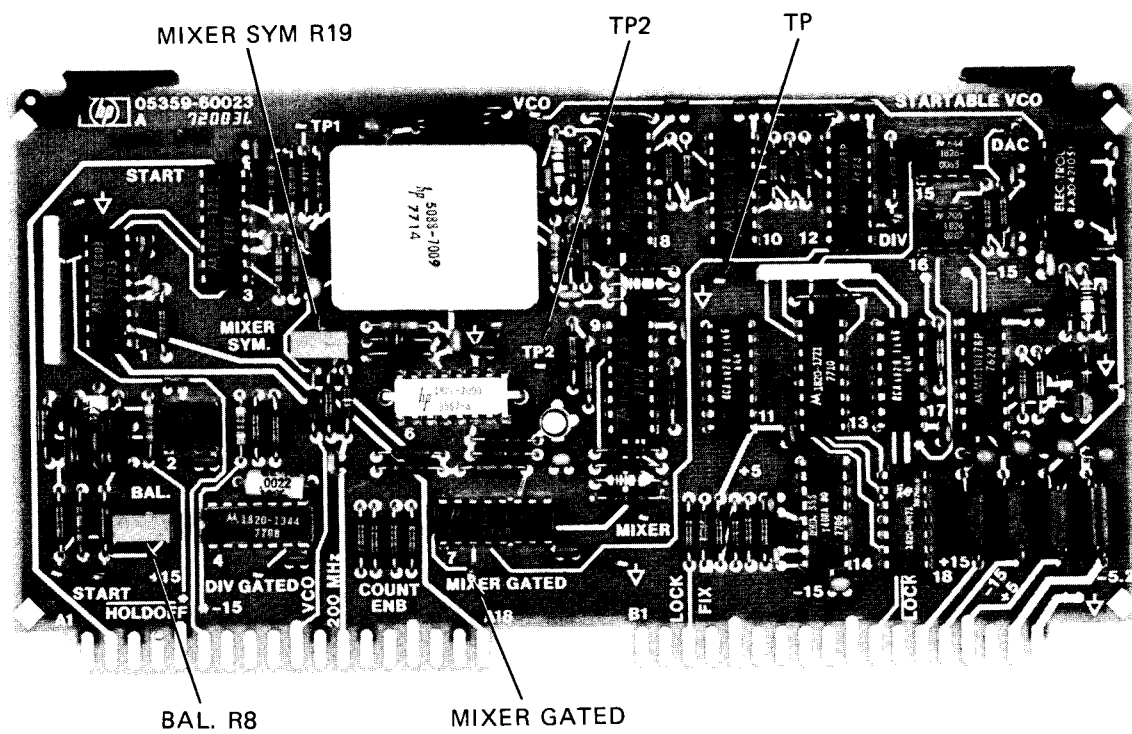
A23 Startable PLL Oscillator Assembly Adjustments (Continued)
